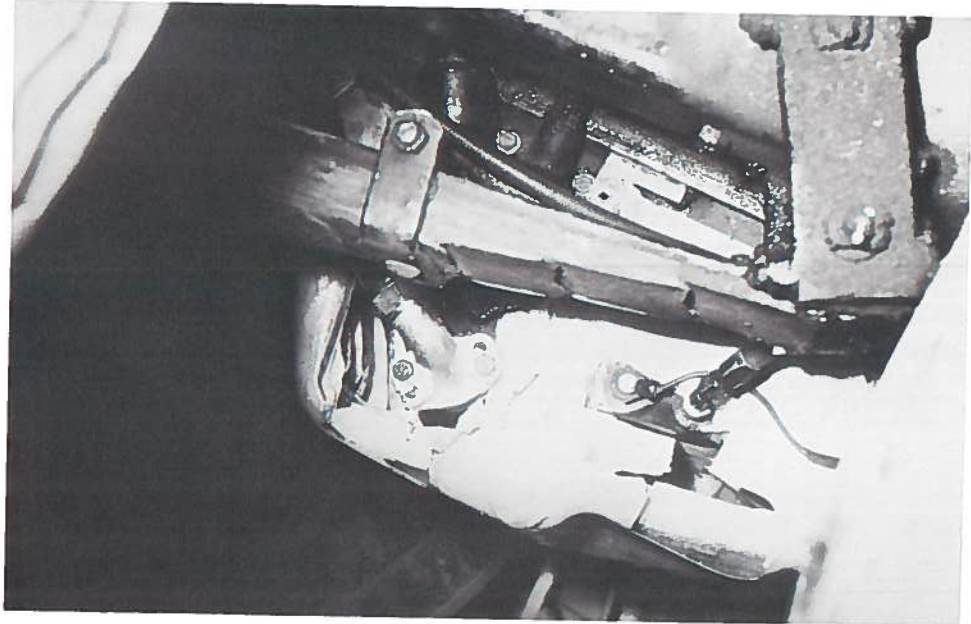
OIL PAN ENCLOSURE AND SUCTION FLANGE INSTALLED.
